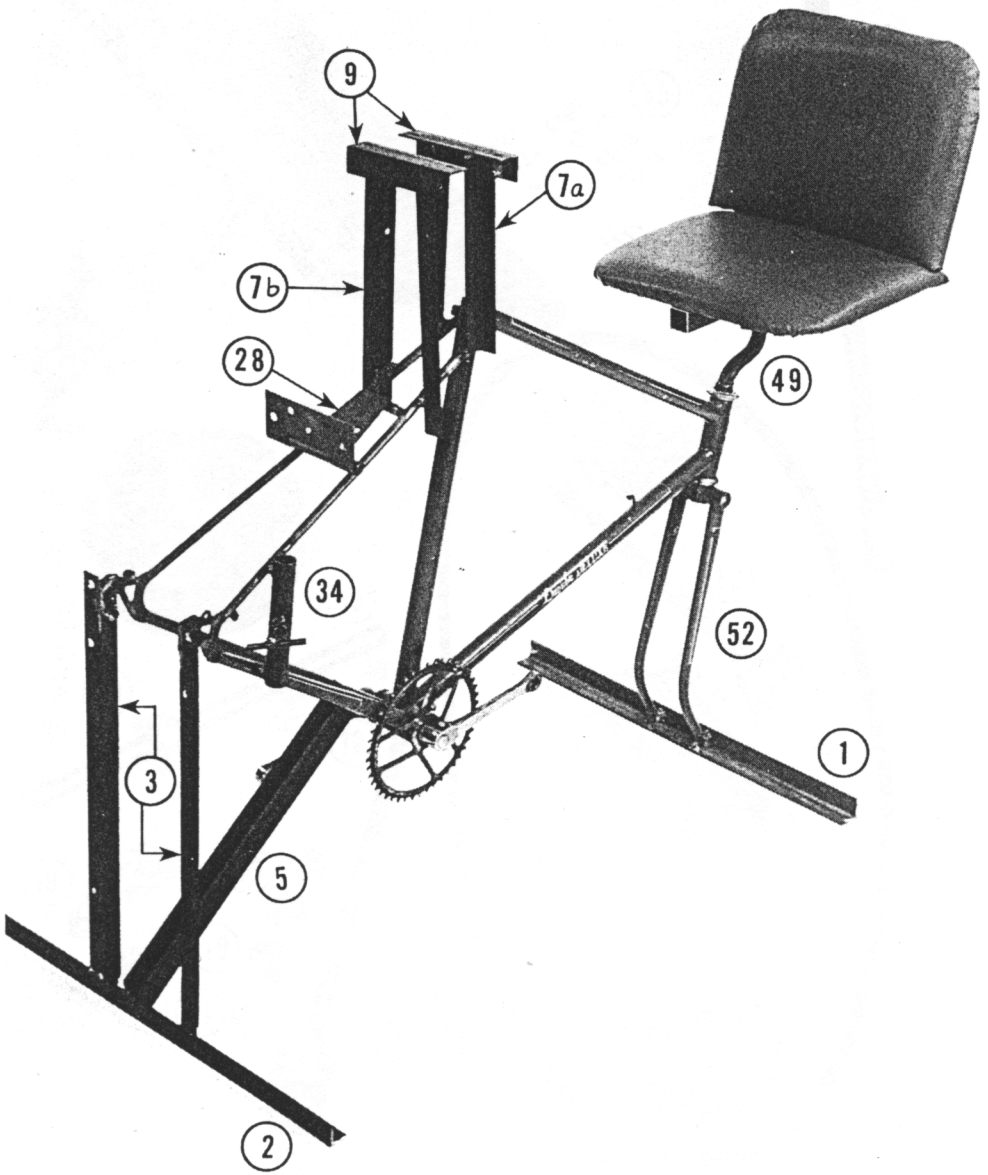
Basic frame with seat, power-head support, hinge for idler, table support tubing, and pedal crank
